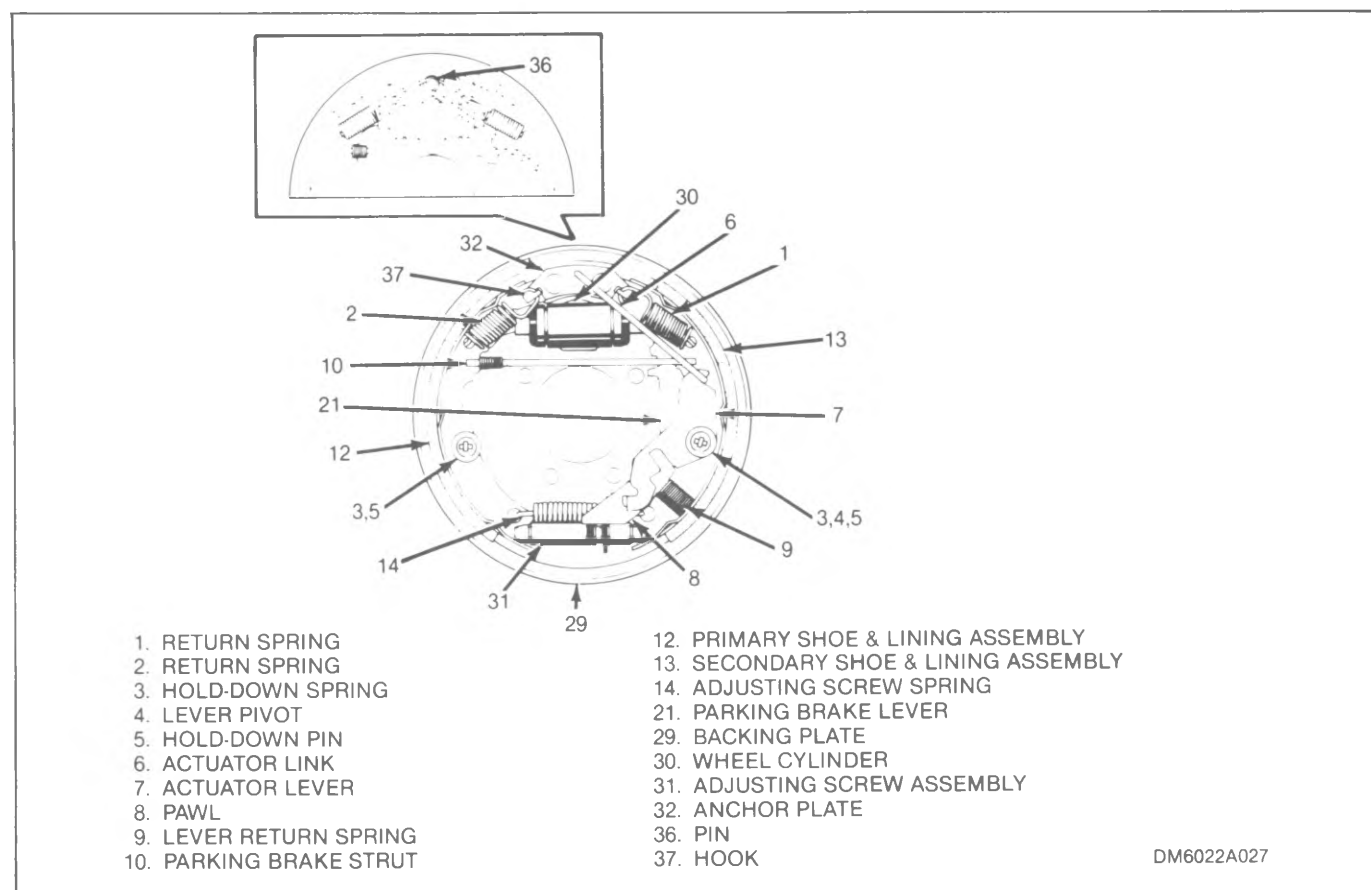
Anchor Plate Duo-Servo Drum Brake
